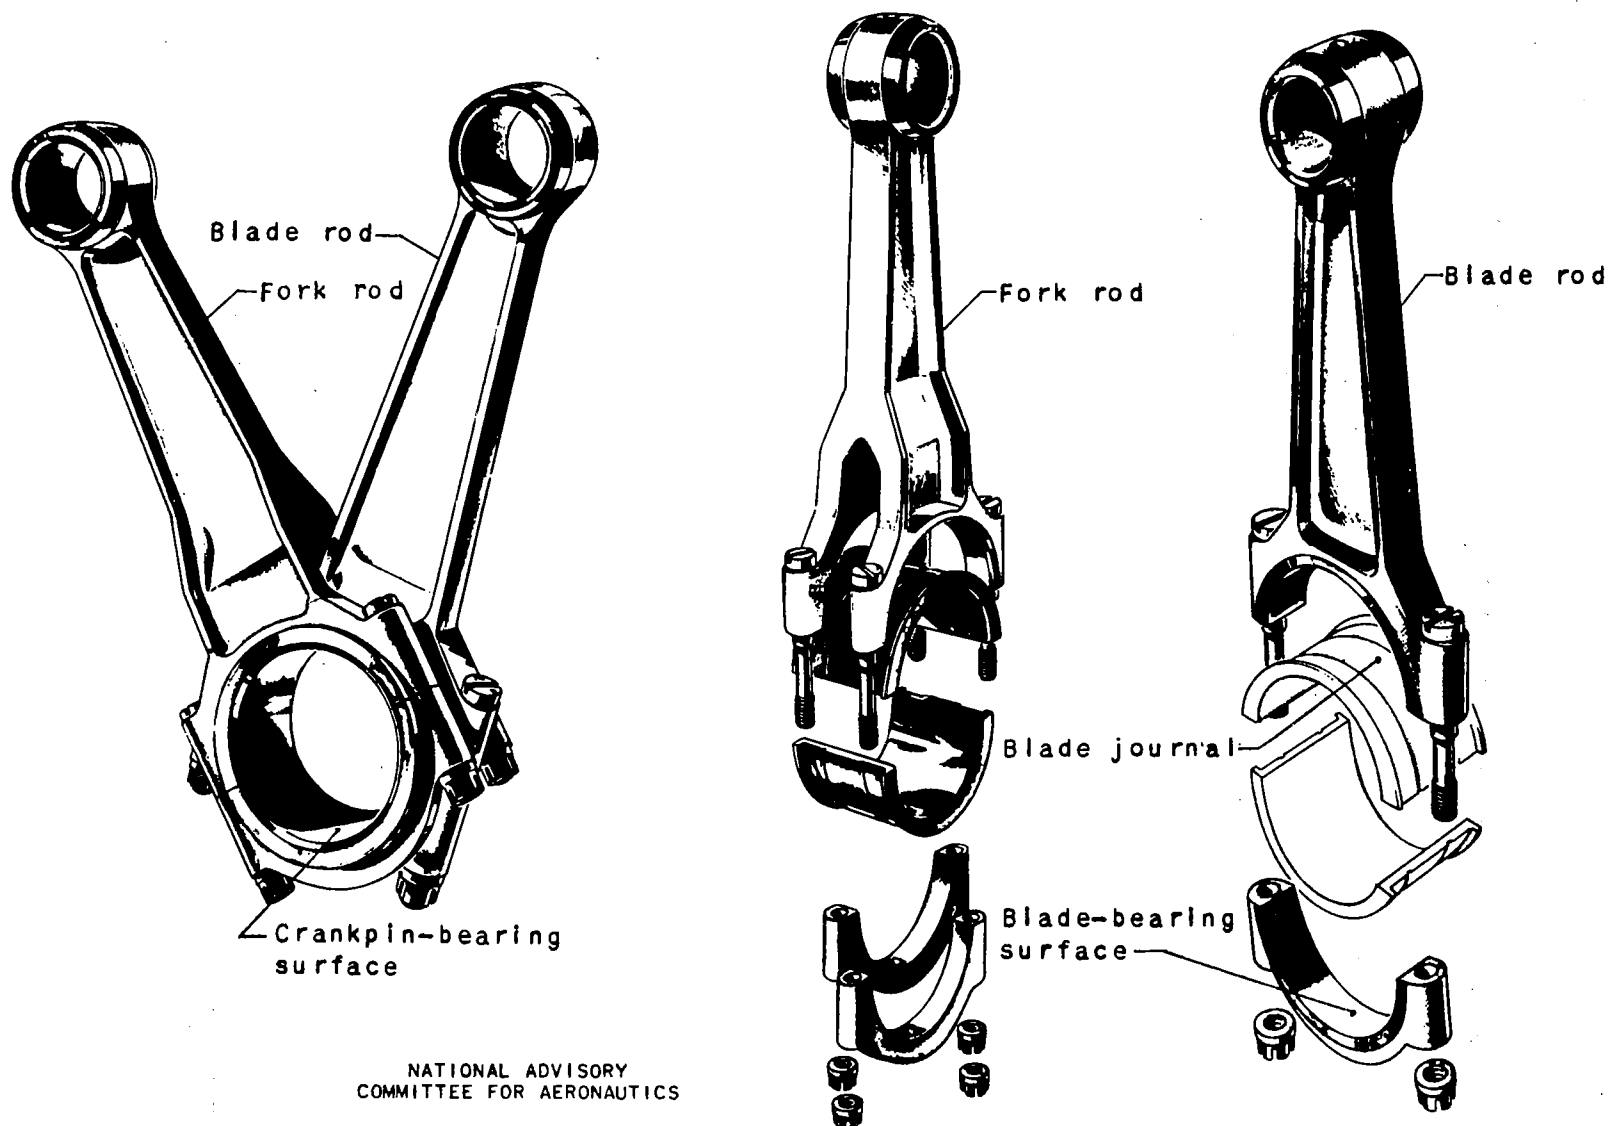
Connecting-rod and blade-bearing arrangement for a V-type engine.
